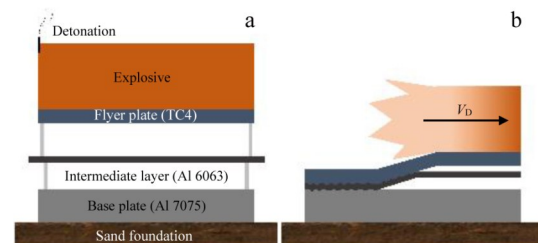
Schematic diagrams of parallel welding device (a) and explosive welding process (b) for TC4/Al 6063/Al 7075
